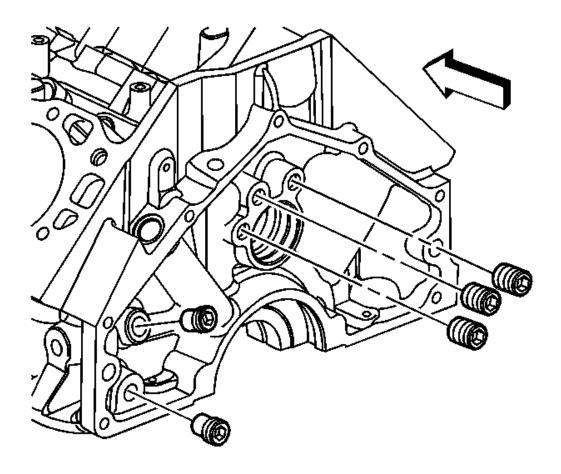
View Of Front Oil Gallery Plugs Courtesy of GENERAL MOTORS CORP.
